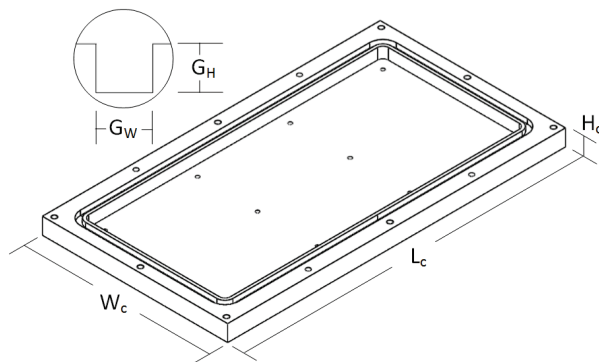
Aluminum support tray and seal design of the PCM test sample.
